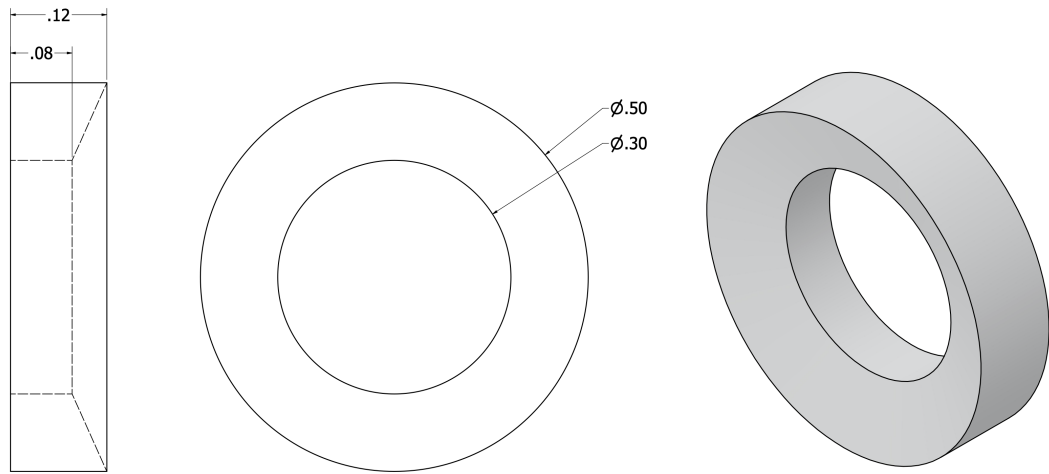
Imperial dimensions (in inches) for the custom 3-D printed spacer component used in the lens end cap ((A) in Figure 6.10). One side features a sloped inner lip to accommodate the shape of the 1/2" lens. CAD model credit: Y. Ko.
